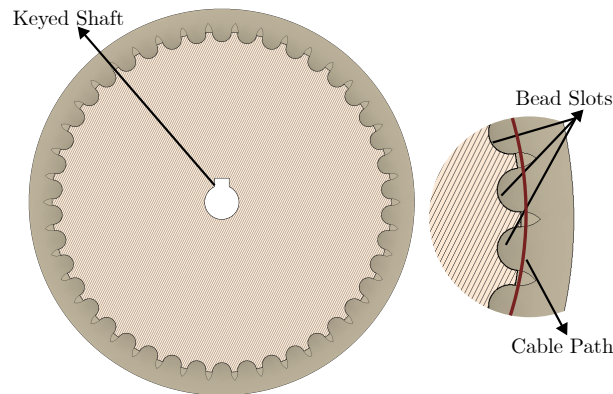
Cross-sectional view of a sprocket used to actuate the beaded cable
